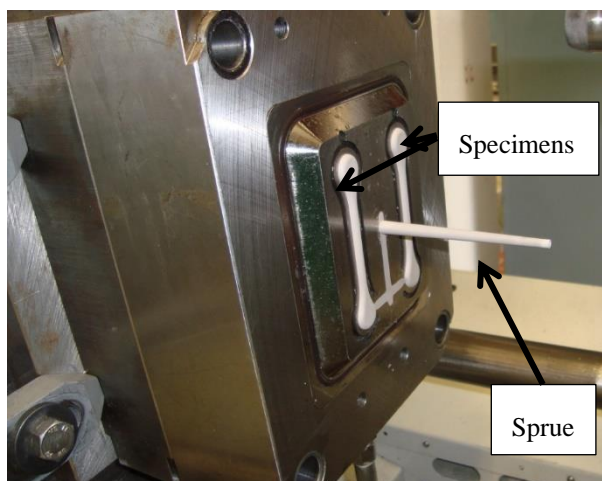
Tool of the injection moulding of dog bone tensile test specimen after injection cycle before ejecting the parts (ejector side of the mould).
